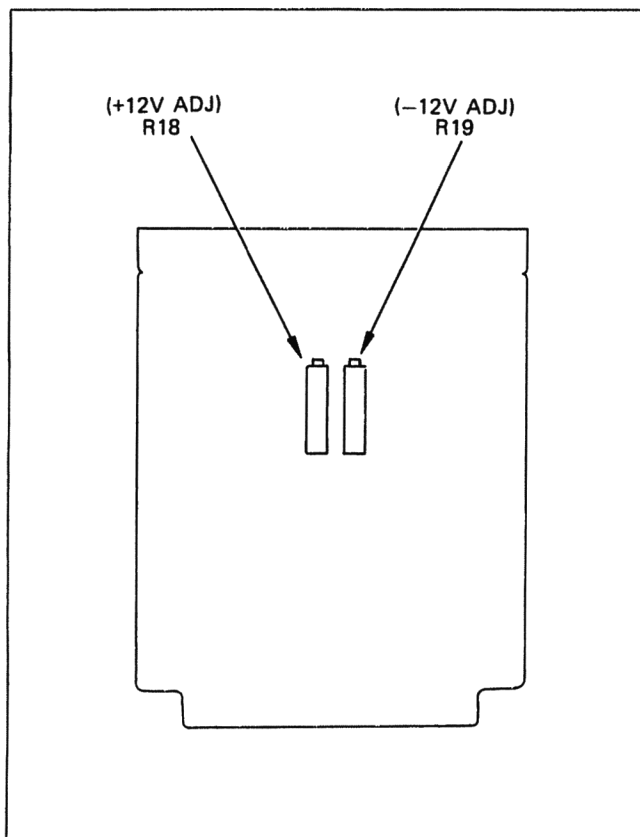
Trimmer Locations, Voltage Regulator Assembly, A31
